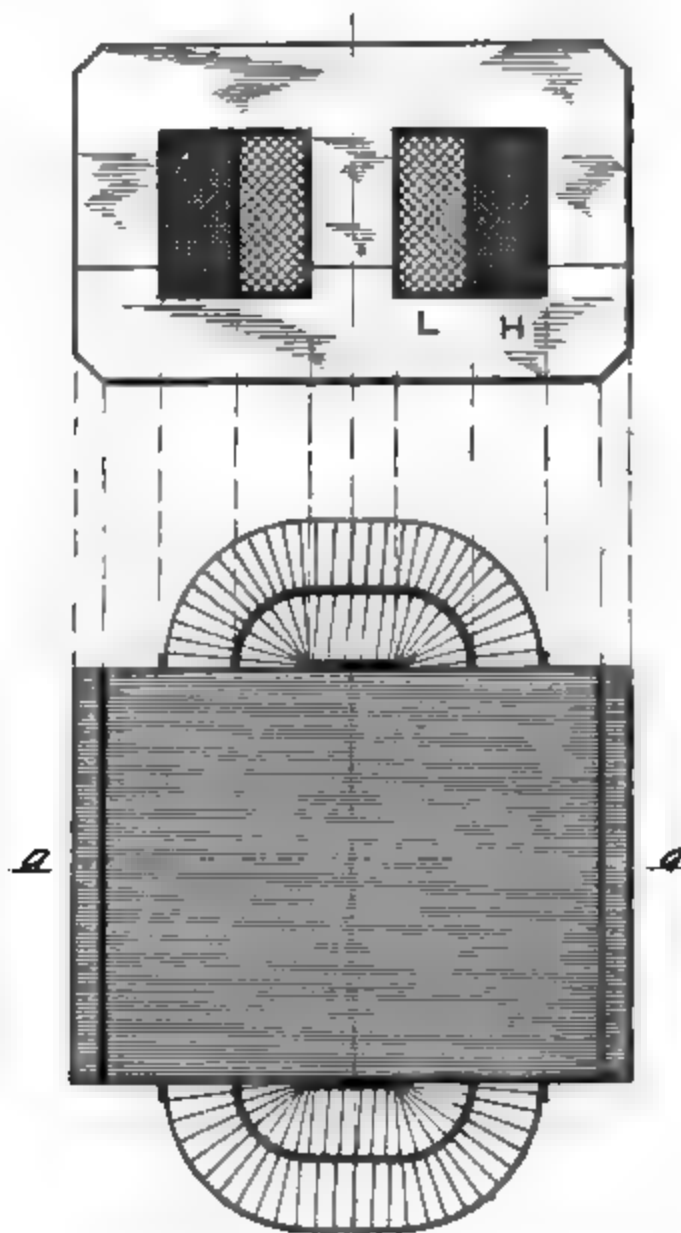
Plan and sectional view of shell-type transformer. Section shown is on line *a-a*.
